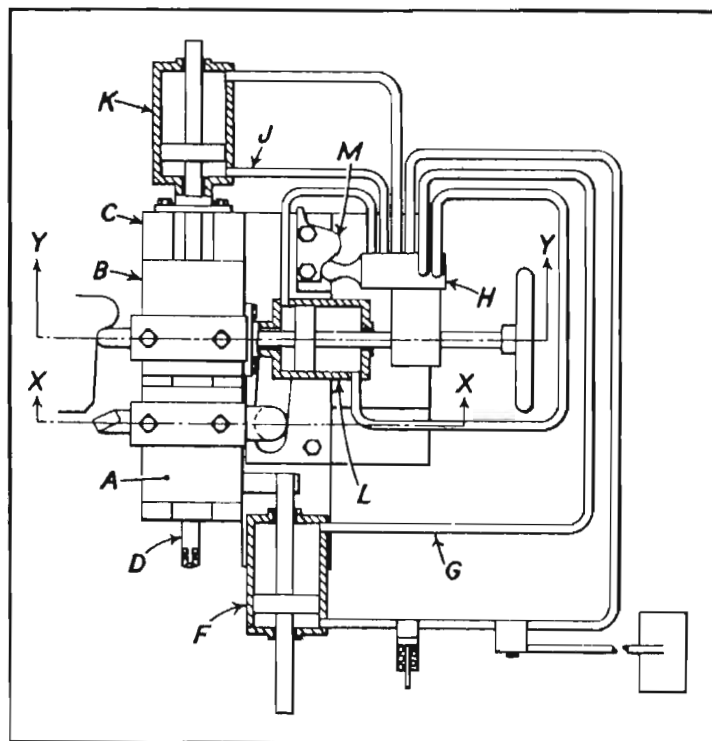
Plan view of a hydraulic copying system for a railroad car wheel lathe that permits turning tread and flange portions simultaneously.
